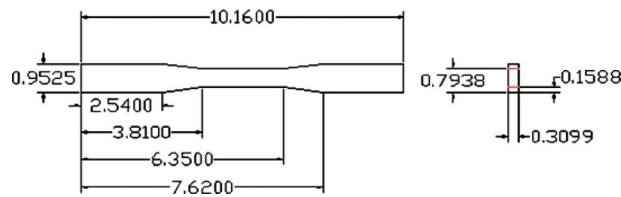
Dimensions (cm) of the ASTM fatigue dog-bone specimen [14]
